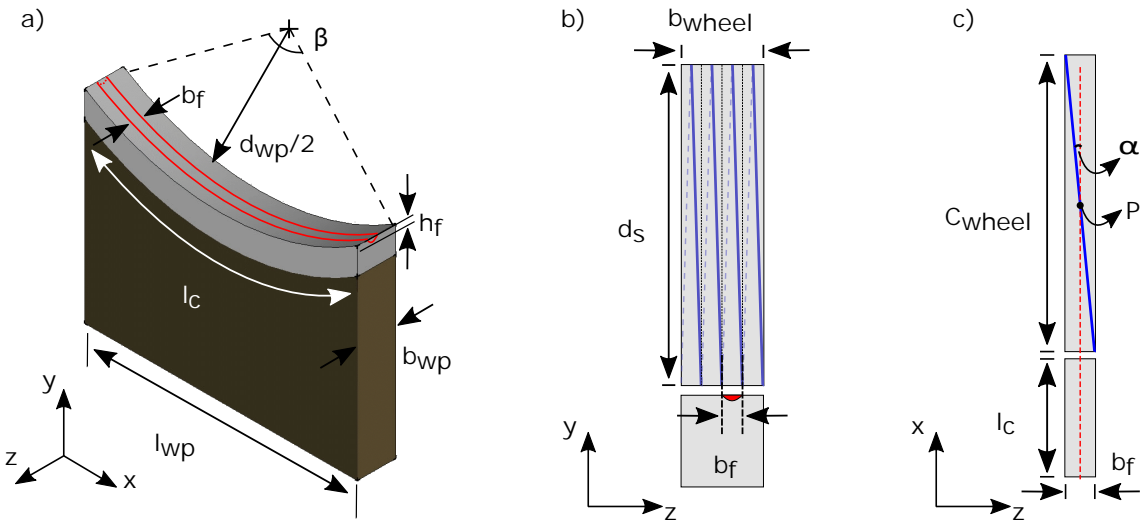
(a) Details of the wire-workpiece contact. Path of wire wrap on the workpiece contact length. (b) The view on the mantle surface of wheel workpiece contact. (c) View of the open-unwrapped wire and contact path of wire section on the workpiece.
